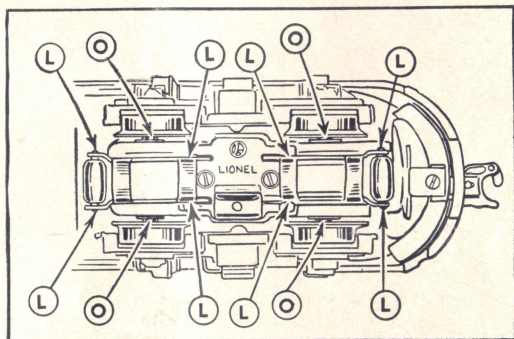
Lubrication Points of a Diesel Locomotive Truck
